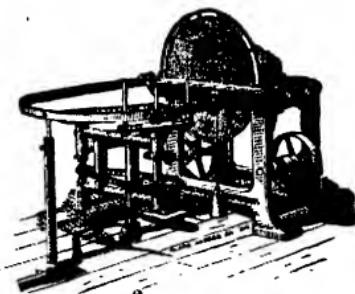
WHEEL-TREAD DRESSING MACHINE.
